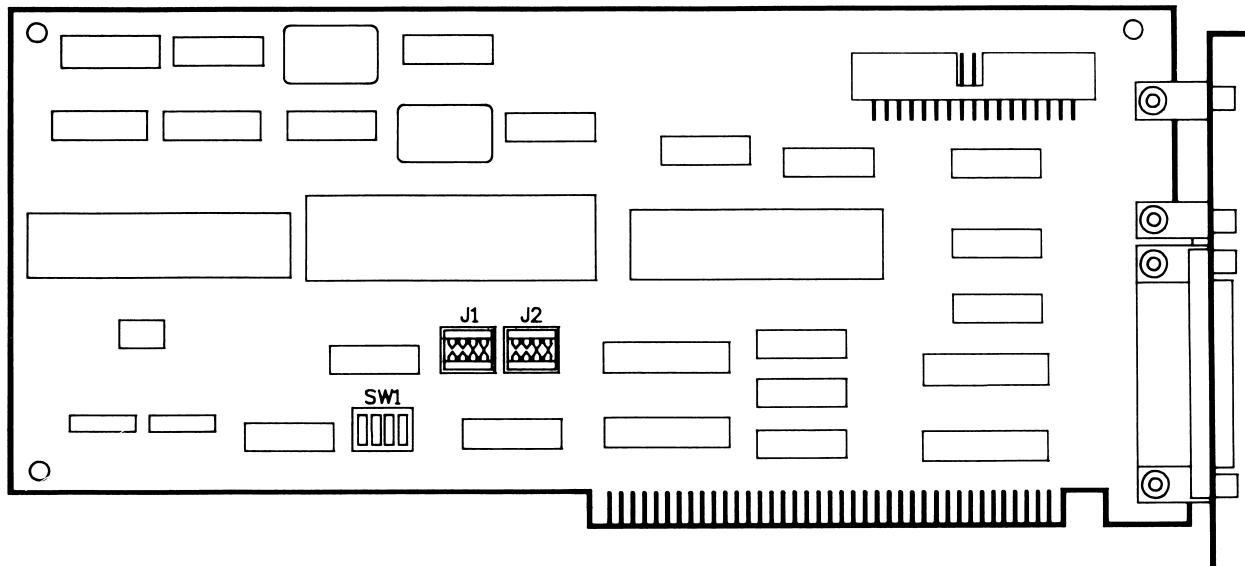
Diskette/Printer Board (assy. no. 000181-011).
